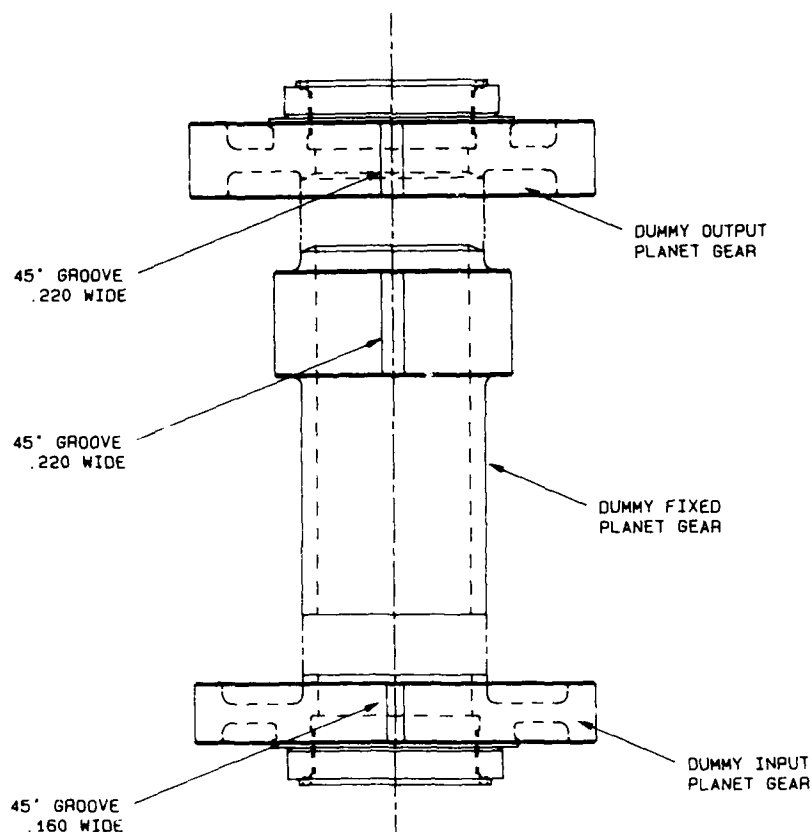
CONFIGURATION FOR DUMMY SPINDLE GEAR ASSEMBLY
